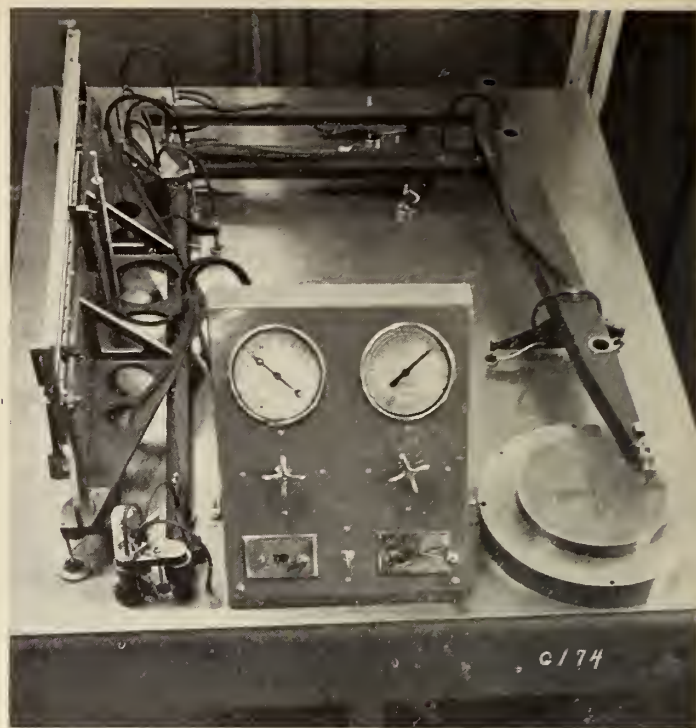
General view of Wilcox multiple engraving machine, showing tool arm at left, master and stylus at right.
